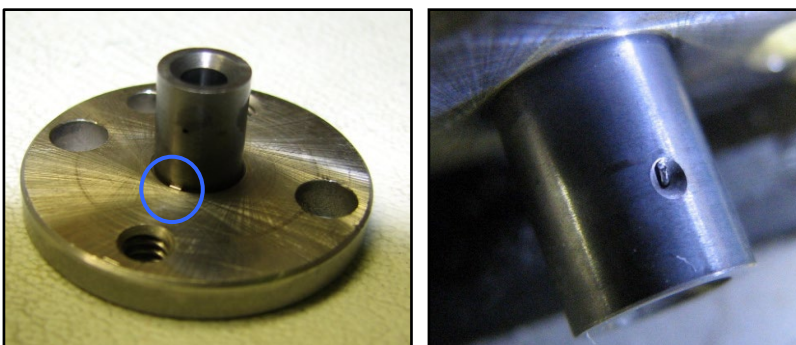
Stray tag at base of cutter sleeve (left) and in the cutter hole (right).
